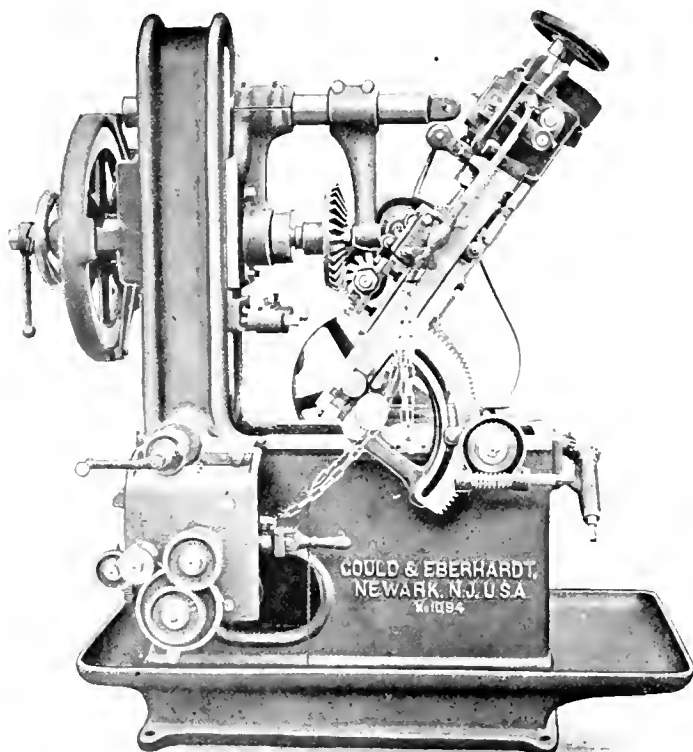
Cutting a Bevel Gear on the Gould & Eberhardt Automatic Machine of the Orthodox Type.
